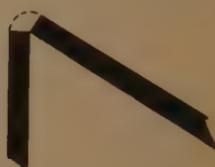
Sharp Corner Weld for Light Sheets
